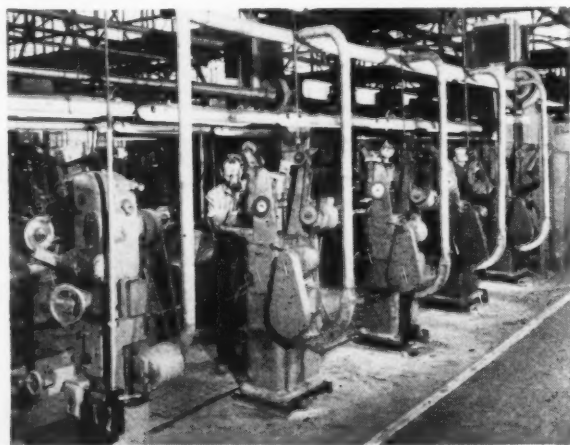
Both saw polishing and finishing inside diameter of valve discs are exhausted by this unit of 2500 cfm capacity.
